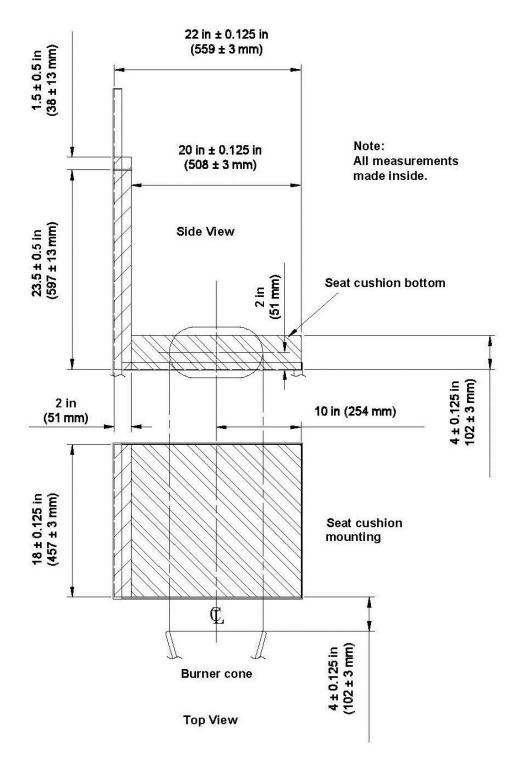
Top and Side View of Seat Test Sample in Test Sample Mounting Frame
